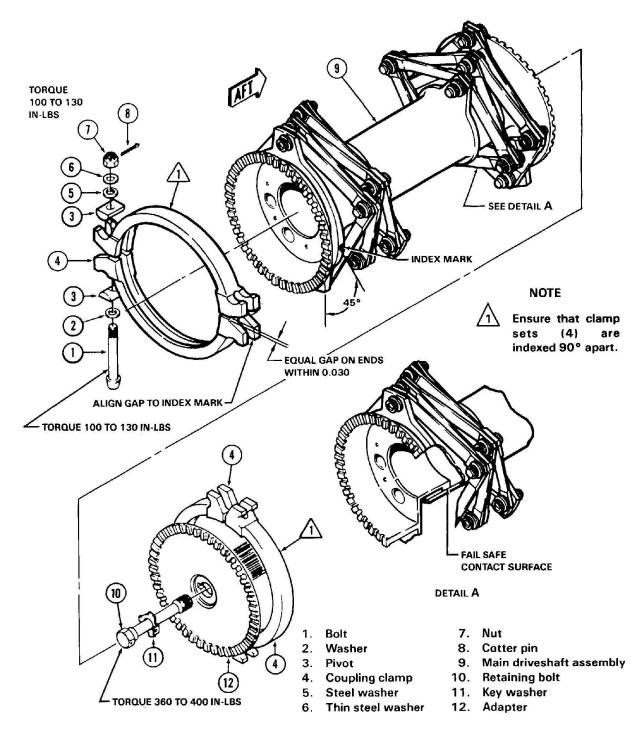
Main Driveshaft Assembly (204-040-433-101)
